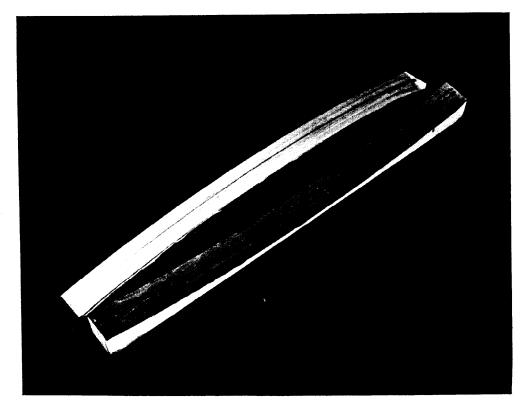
Female tool and pattern disassembled with metal door track removed.
